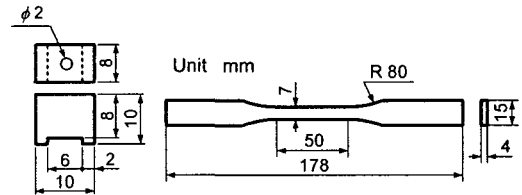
Shape and dimension of fretting fatigue specimen and bridge pad
